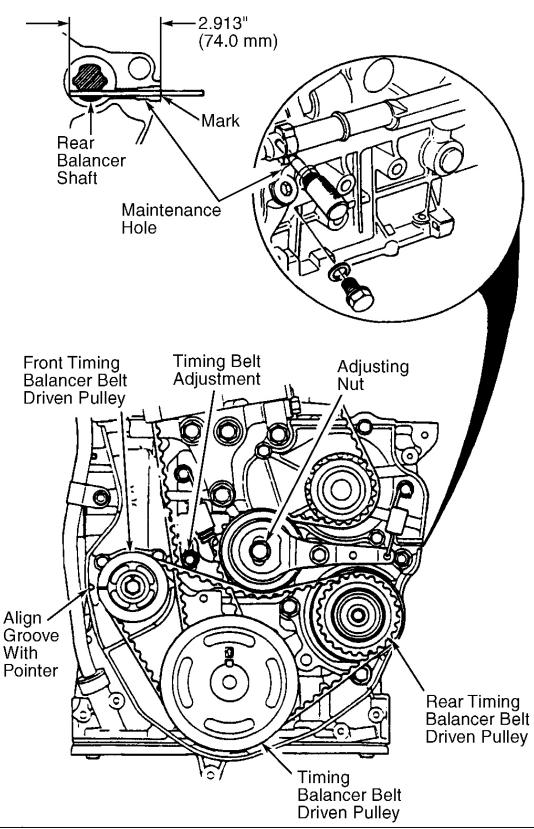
Removing & Installing Timing & Balance Shaft Belts Courtesy of AMERICAN HONDA MOTOR CO., INC.
